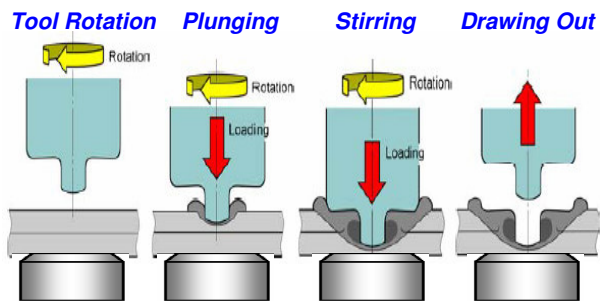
Illustration of Friction stir spot welding (FSSW) process and joining mechanism
